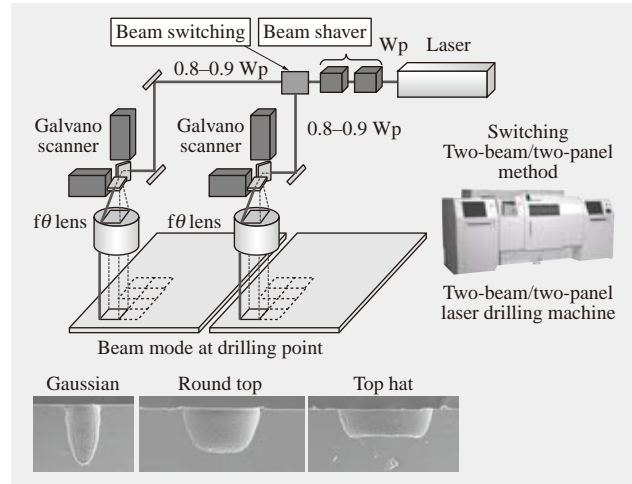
Technologies Used in Laser Drilling Machines. Beam mode control technology and optics and other technologies required for laser drilling machines.
